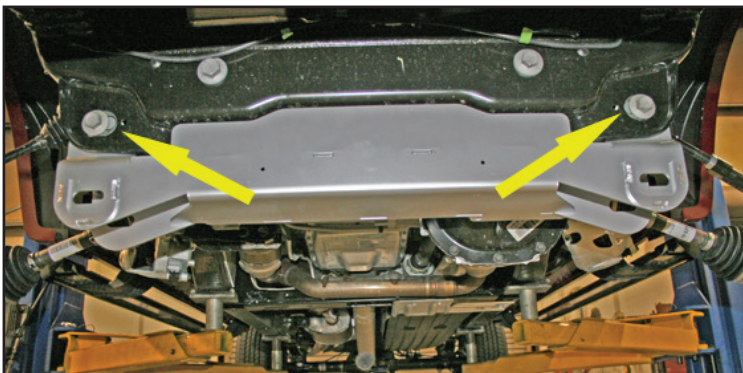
Install the supplied 9/16" x 3-3/4" bolt, washer, and nut from the rear, through the sway bar bracket, differential rear mount and the rear crossmember. Do not tighten.
